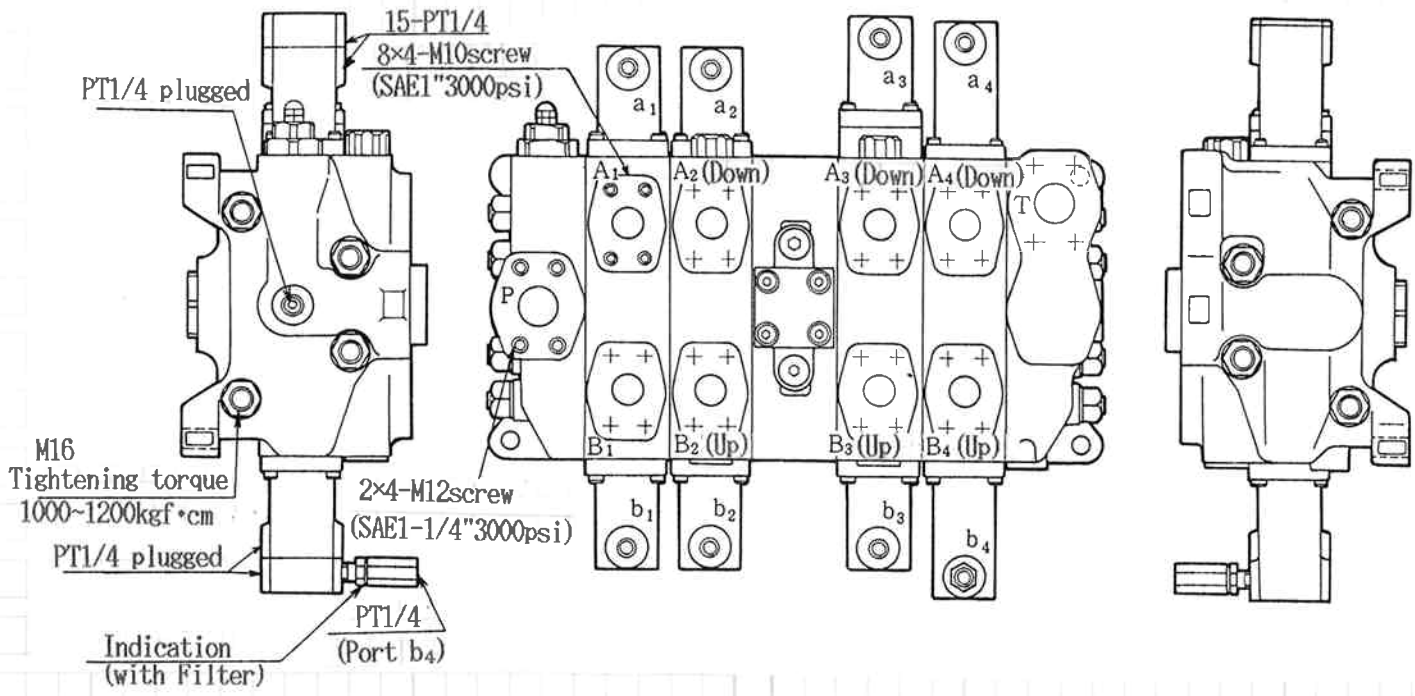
A MWP425/2SCT1516 (for 7055•7065)
